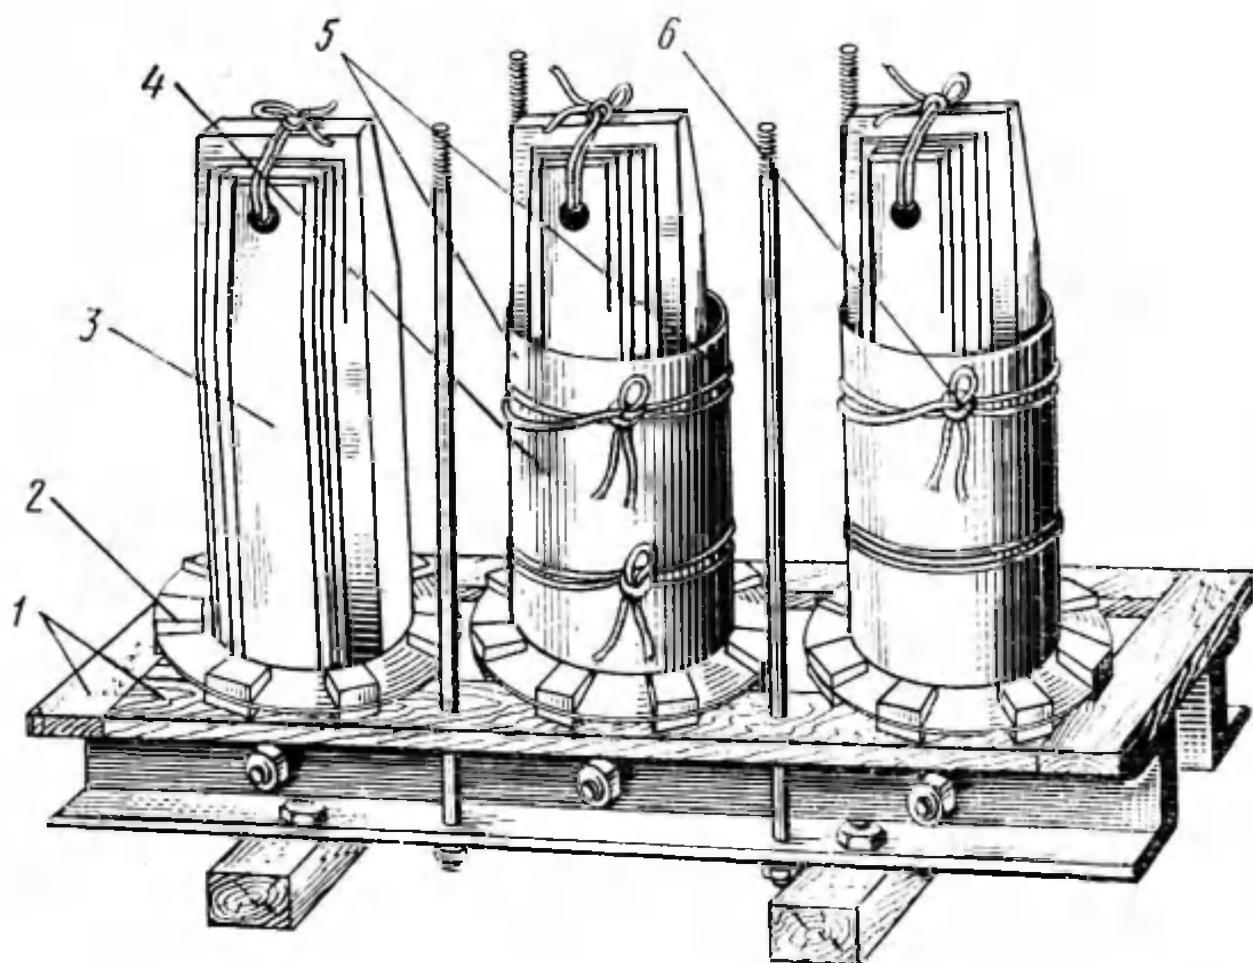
Mounting the coil-end and yoke insulation on transformers of up to 1 600 kV A at 10 kV
